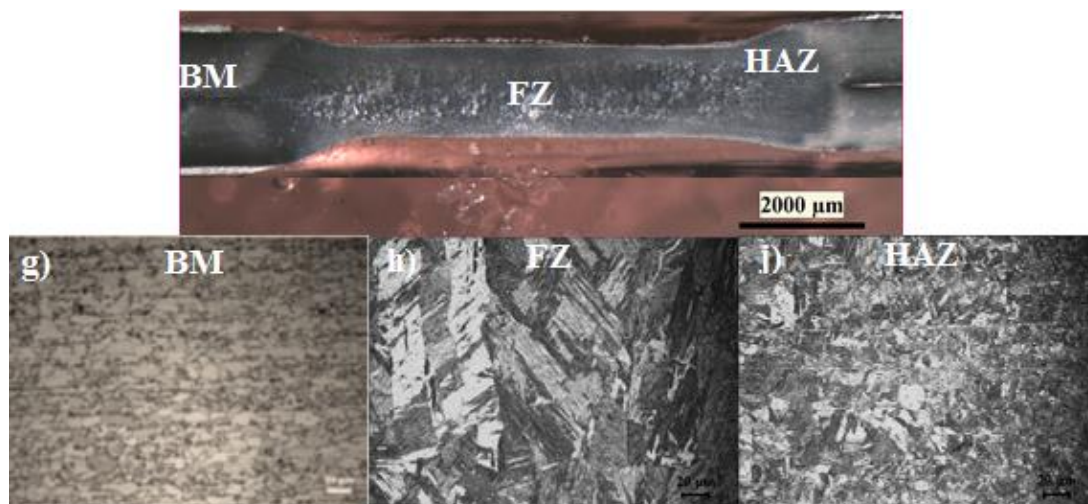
The weld zone profile and its microstructures of DP600 weldment joined with 5.5 Bar electrode force with 6kA welding current. g) DP600 base metal (BM), h) DP600 Heat Affect Zone (HAZ), j) DP600 weld nugget (FZ).
